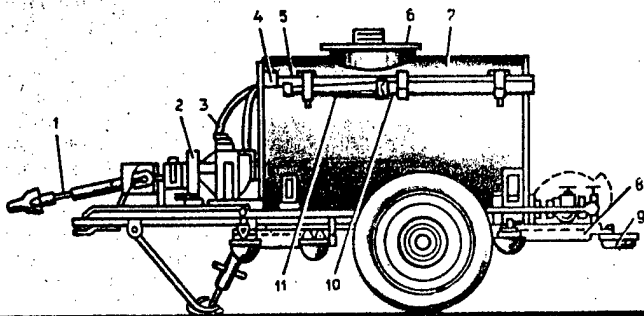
PAP-10A Self-Waterer: 1-- Cardan shaft; 2--pump; 3--drain hose; 4--filter; 5--filling hose; 6--spout; 7--tank; 8--frame; 9--PA-1 waterer; 10--drain hose connecting head; 11-- RS-50 nozzle
